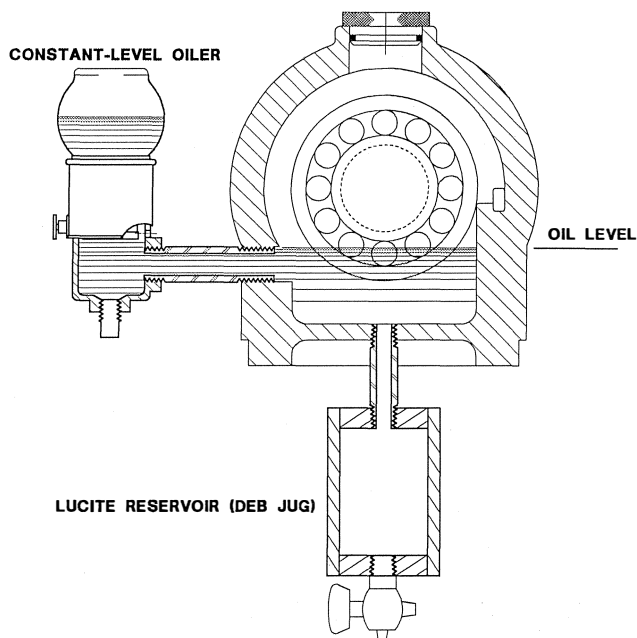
Deb Jug and Constant Level Oiler Arrangement.
